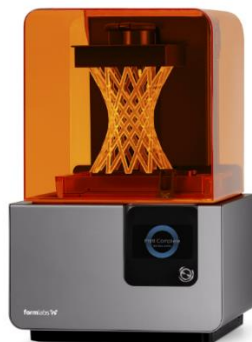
SLA 3D printer used for the printing of microstructures positive molds (Manufacturer: Formlabs; Model: *Form 2*).
